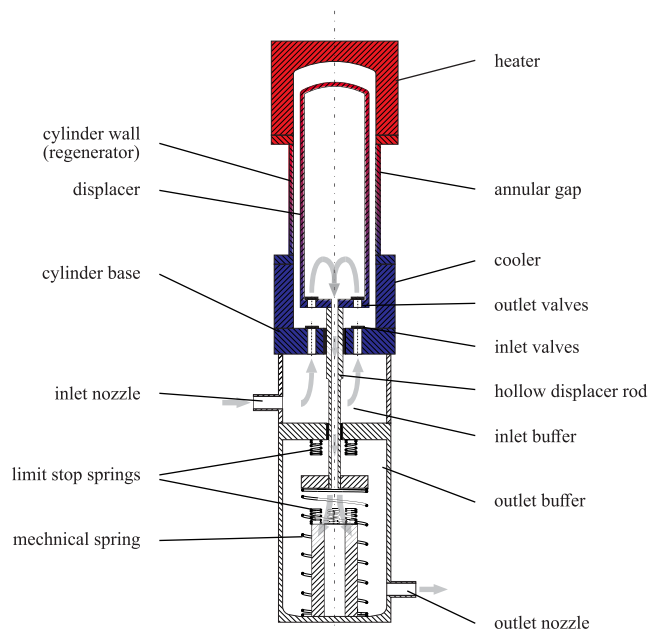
Schematic drawing of the prototype of the thermocompressor with overdriven free-displacer and annular gap (following [24]).
